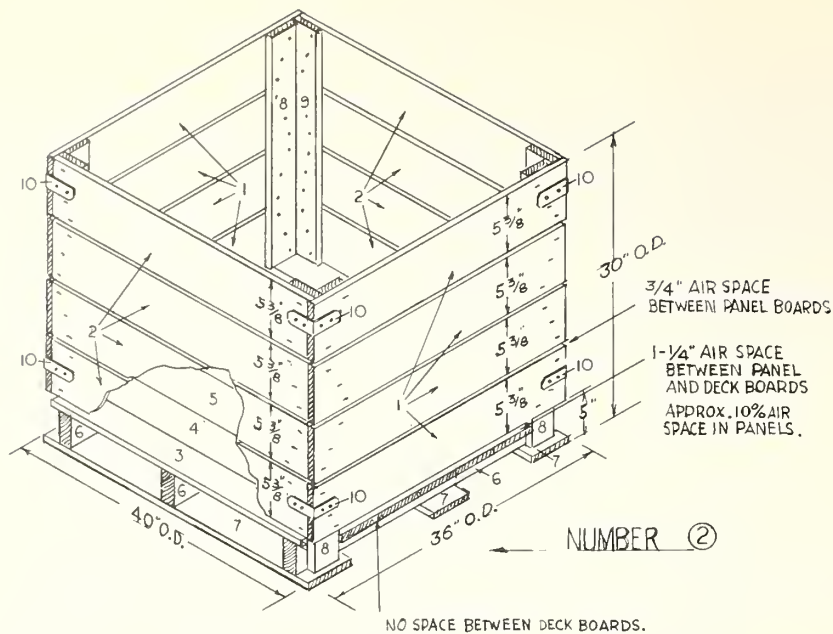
Test pallet box No. 2 with spaced sides, solid bottom, and an inside depth of 25 inches.
